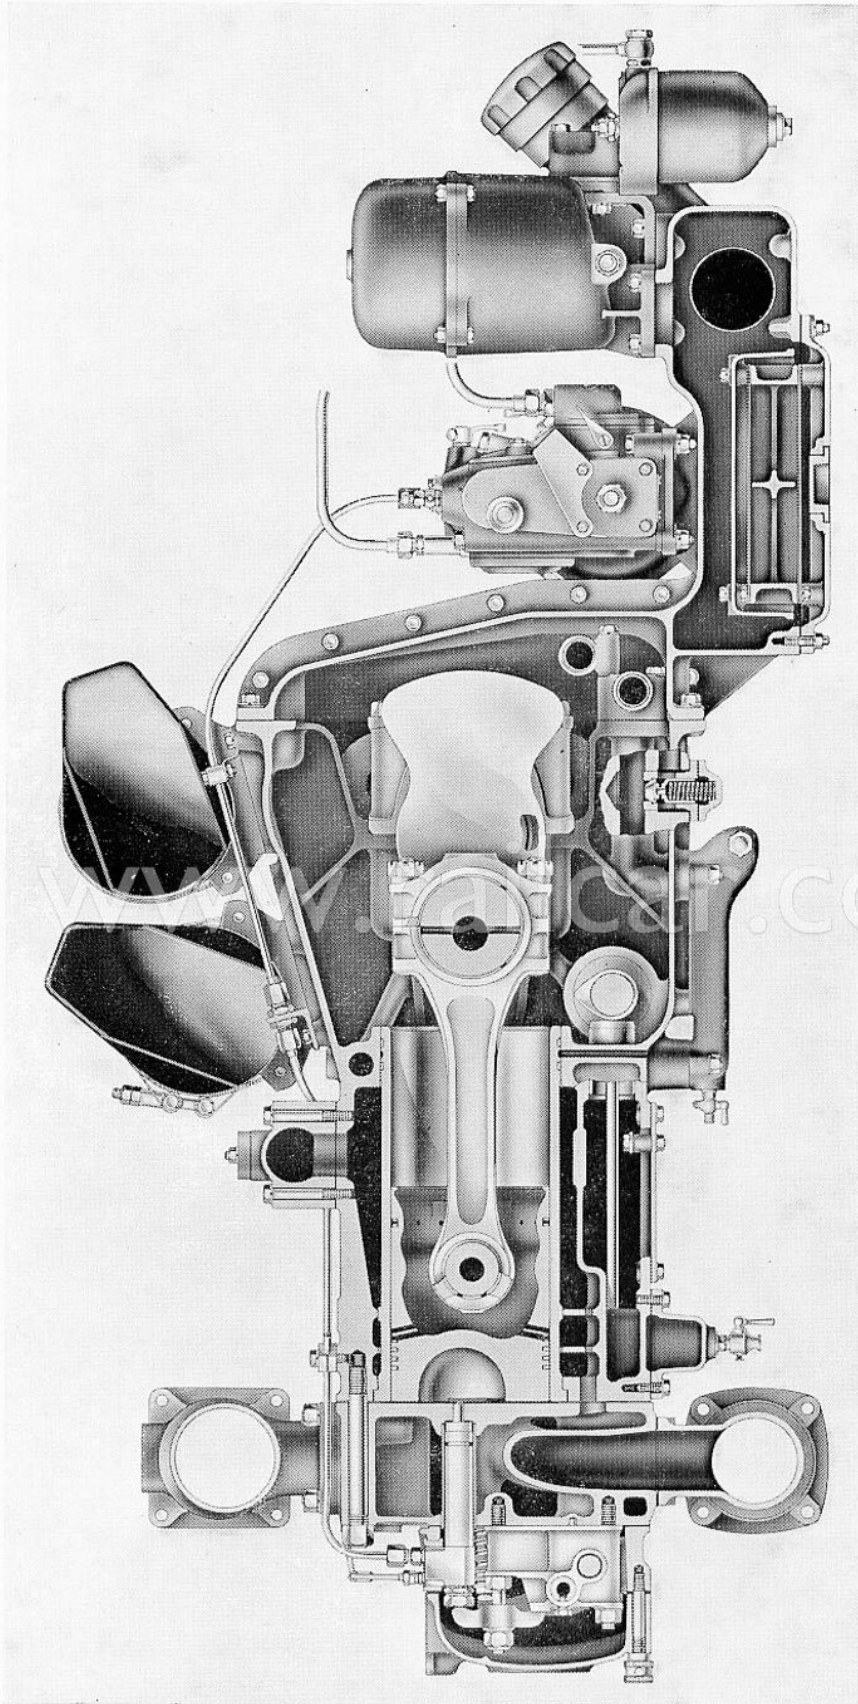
CROSS SECTION THROUGH HORIZONTAL ENGINE
